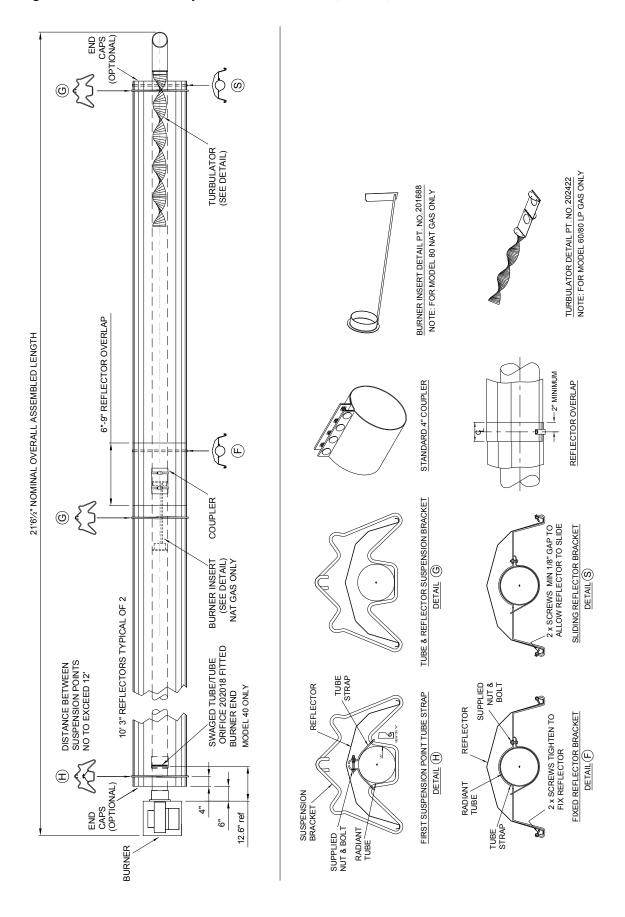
Heater Assembly: Model Linear 40-S30, 60-S30, 80-S30 and 100-S30.
